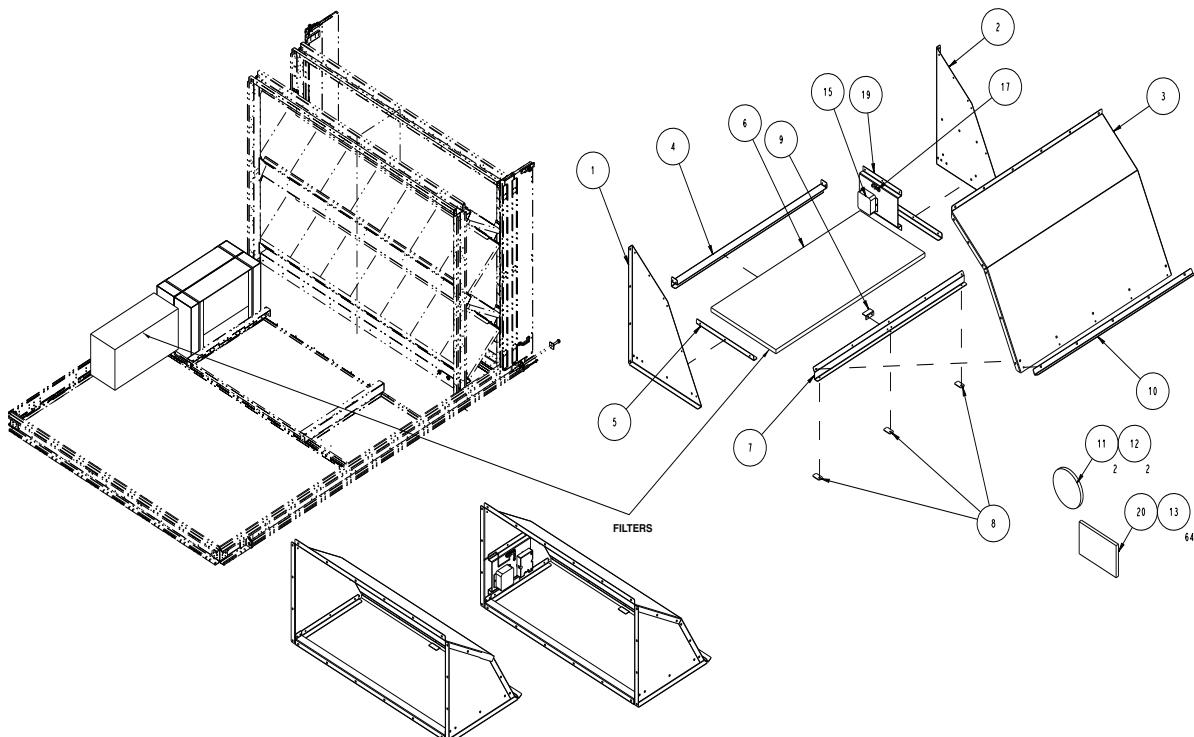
Hood Parts Detail; Filter Packaging Location
